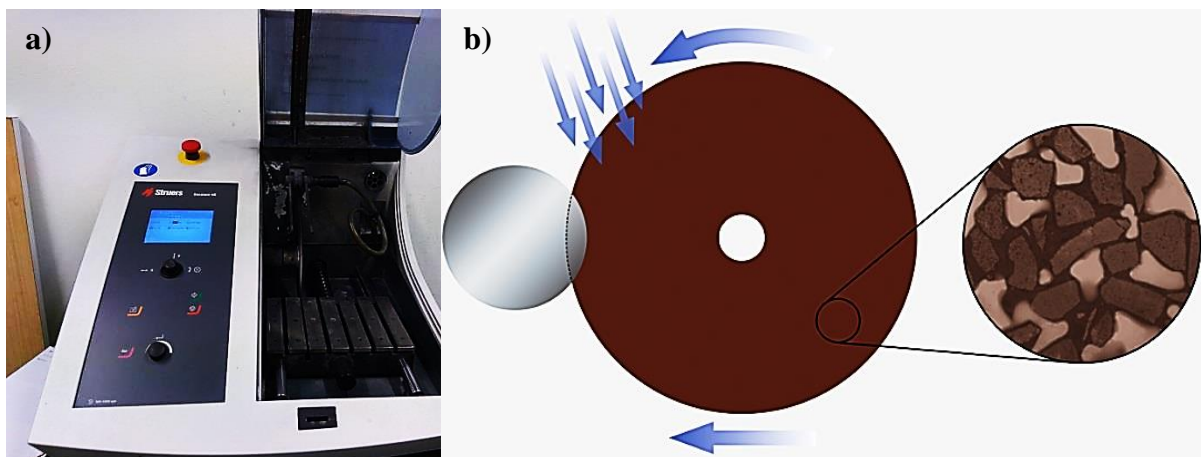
a) Secotom50® cutting machine. b) Illustration of the direct cutting process used (Struers 2015).
